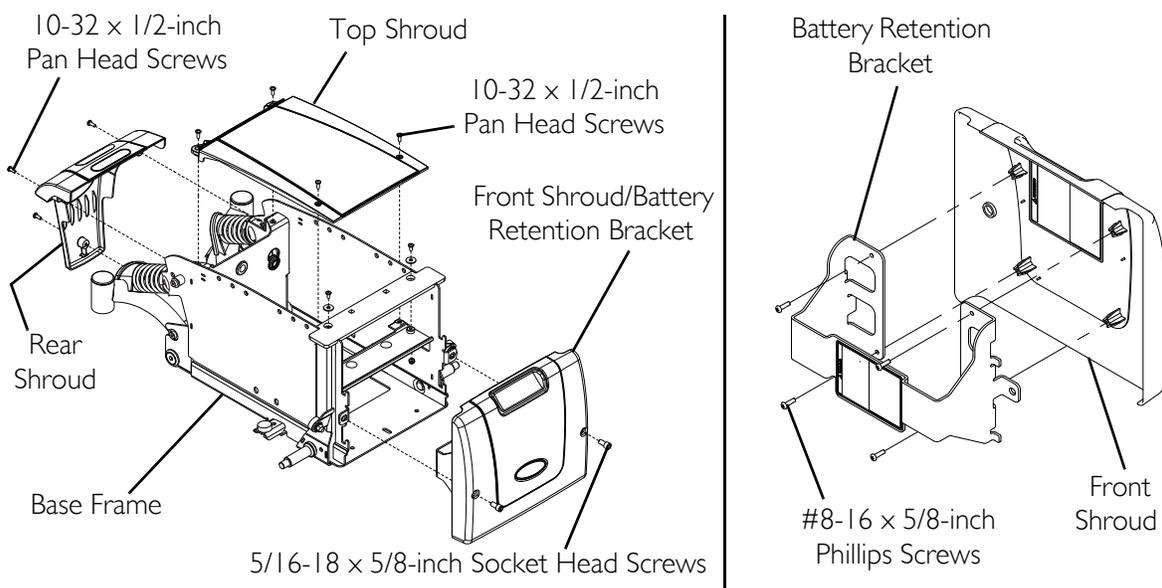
Removing/Installing the Wheelchair Shrouds
